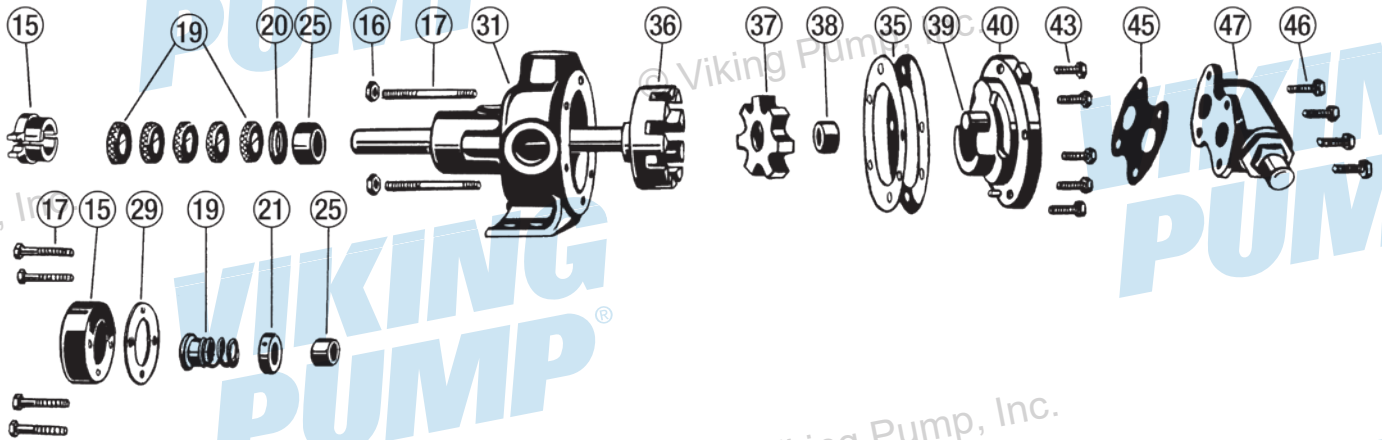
EXPLODED VIEW FOR SIZES G - 32 SERIES™ & 432 SERIES™
